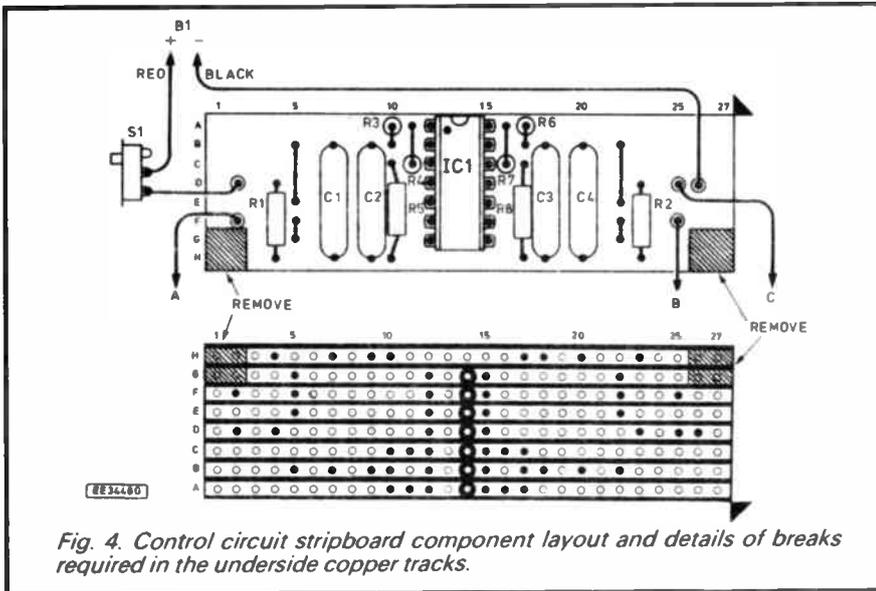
Control circuit stripboard component layout and details of breaks required in the underside copper tracks.
